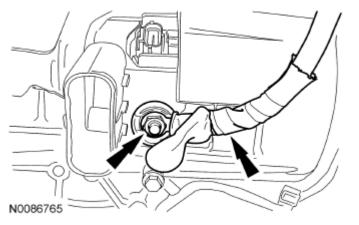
Locating Nut And Generator B+ Wiring Harness Courtesy of FORD MOTOR CO.
